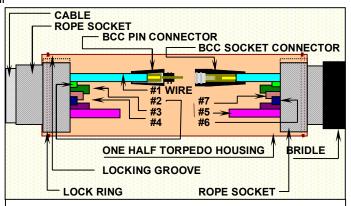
A drawing, illustrating the internal construction and principles of the split torpedo.
